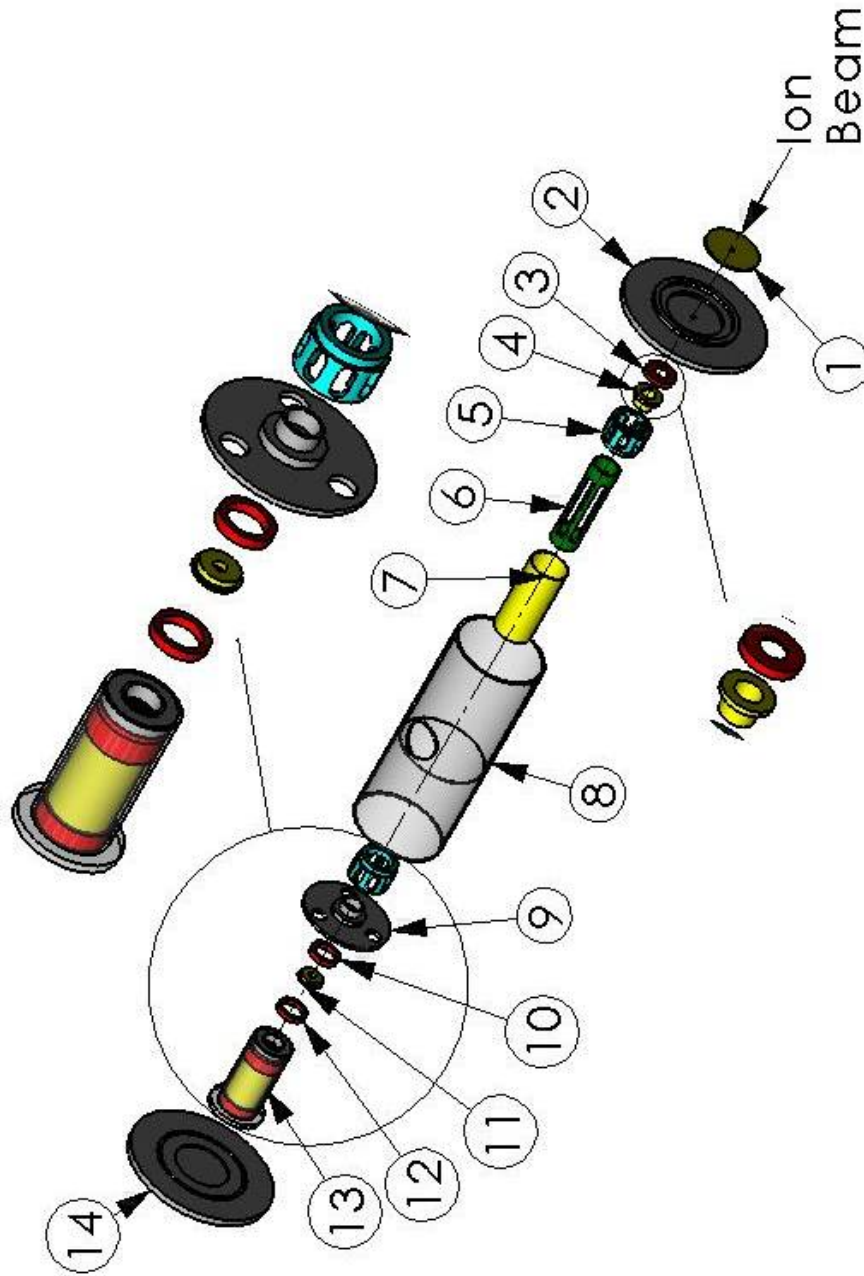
Exploded view of the collision chamber apparatus used for electron-capture cross-section measurements. ① First isolated plate (A₁) with 2.5 mm diameter slit. ② Gas chamber entrance with 2 mm diameter slit. ③ Insulator ring for the first Faraday cup. ④ First Faraday cup (FC₁) for incoming current normalization. ⑤ Insulator holder for meshed cylinder and slow particles collector. ⑥ Meshed cylinder. ⑦ Slow particle collector. ⑧ Gas chamber external cylinder with aperture for target gas inlet. ⑨ Flange for aligning the system with 10 mm diameter slit. ⑩ Insulator ring. ⑪ Isolated ring with 10 mm diameter aperture for retarding of doubly charged ions. ⑫ Insulator ring. ⑬ Faraday cup (FC₂) for ion attenuation measurement. ⑭ End flange of gas chamber.
